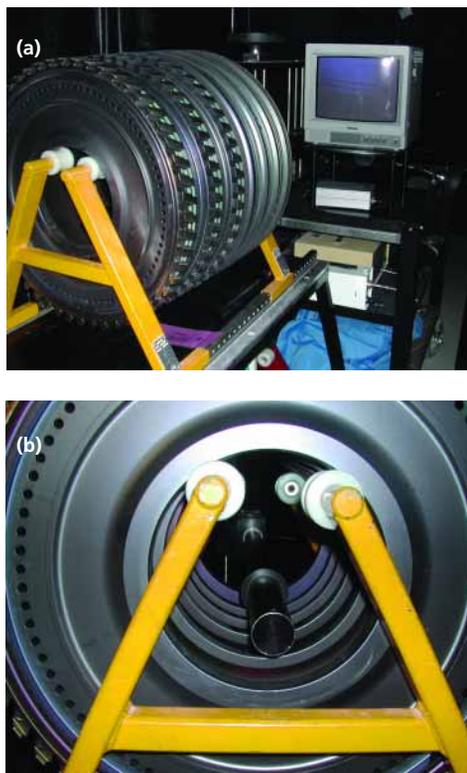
Drum rotor mounted on inspection fixture: (a) viewing system shown in background; (b) view through center of drum rotor showing viewing system inserted.
